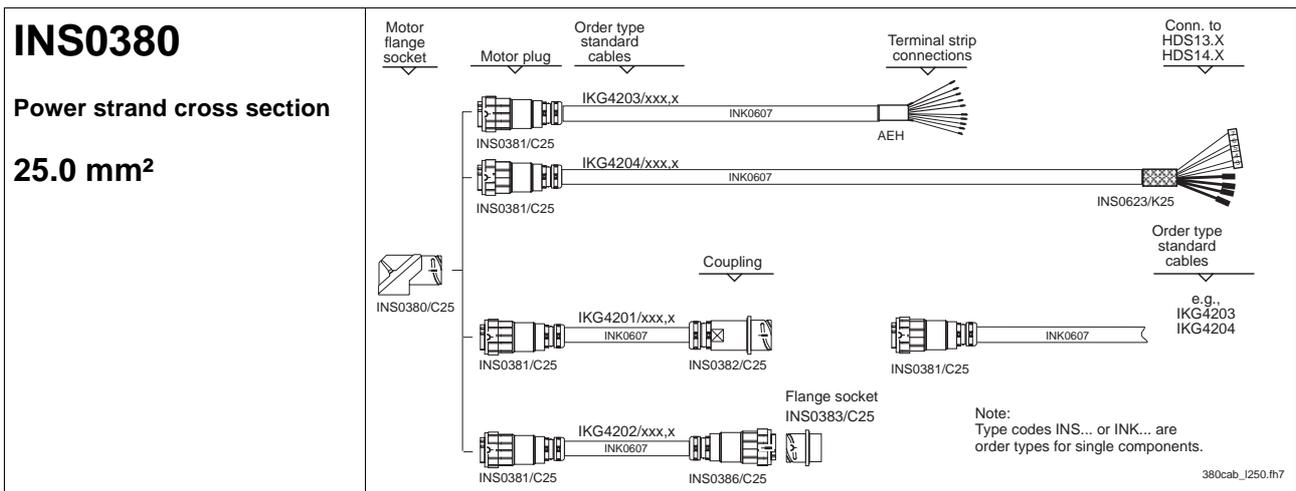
Motor power cable 25.0 mm<sup>2</sup> of flange socket INS0380
